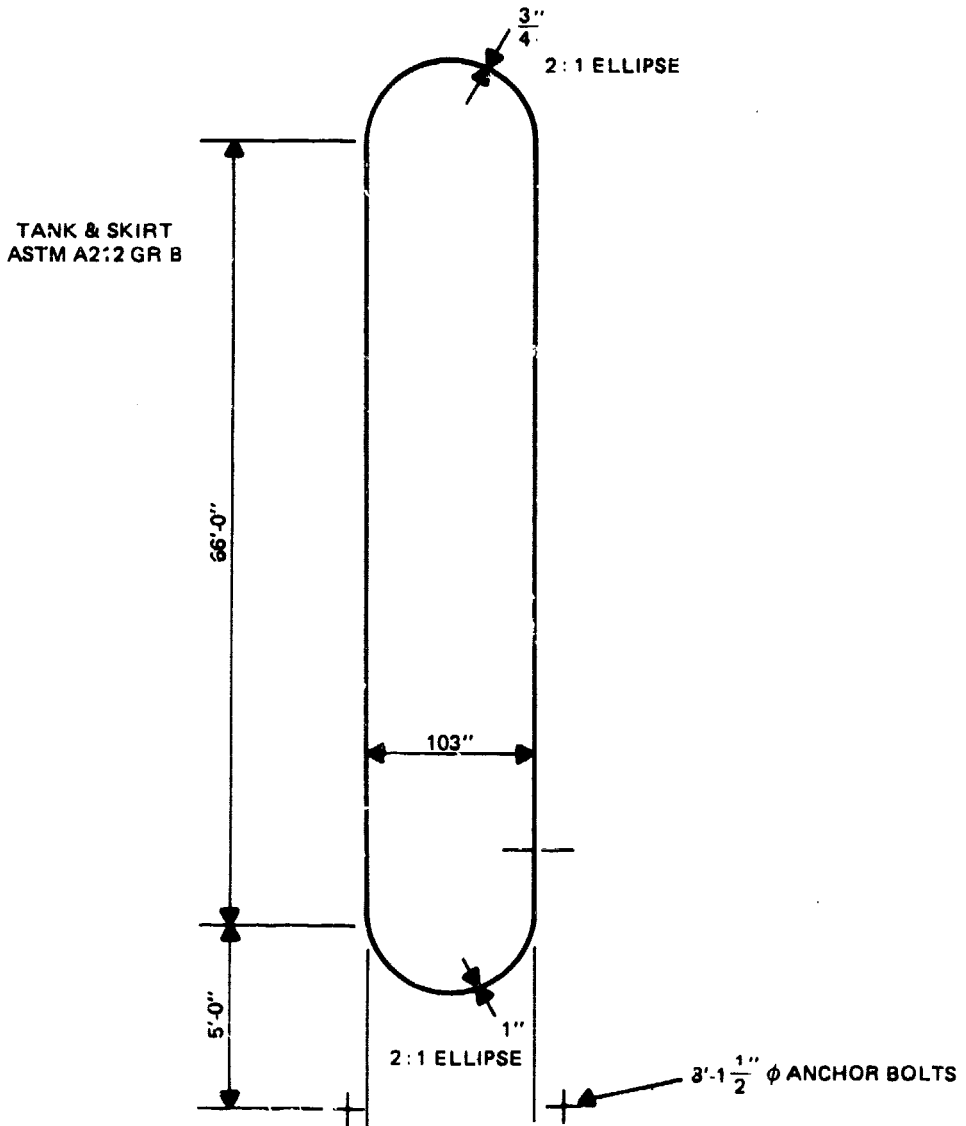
ELEVATION VIEW OF PROPOSED OXNARD LNG STORAGE FACILITY
